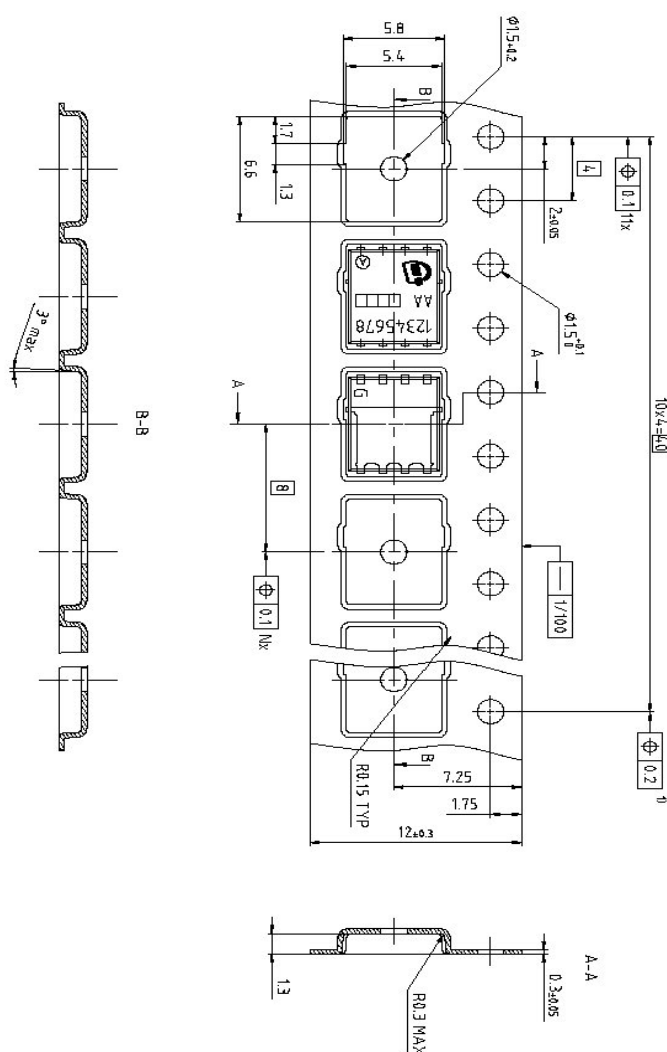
Packaging variant PG-TDSON-8, dimensions in mm
